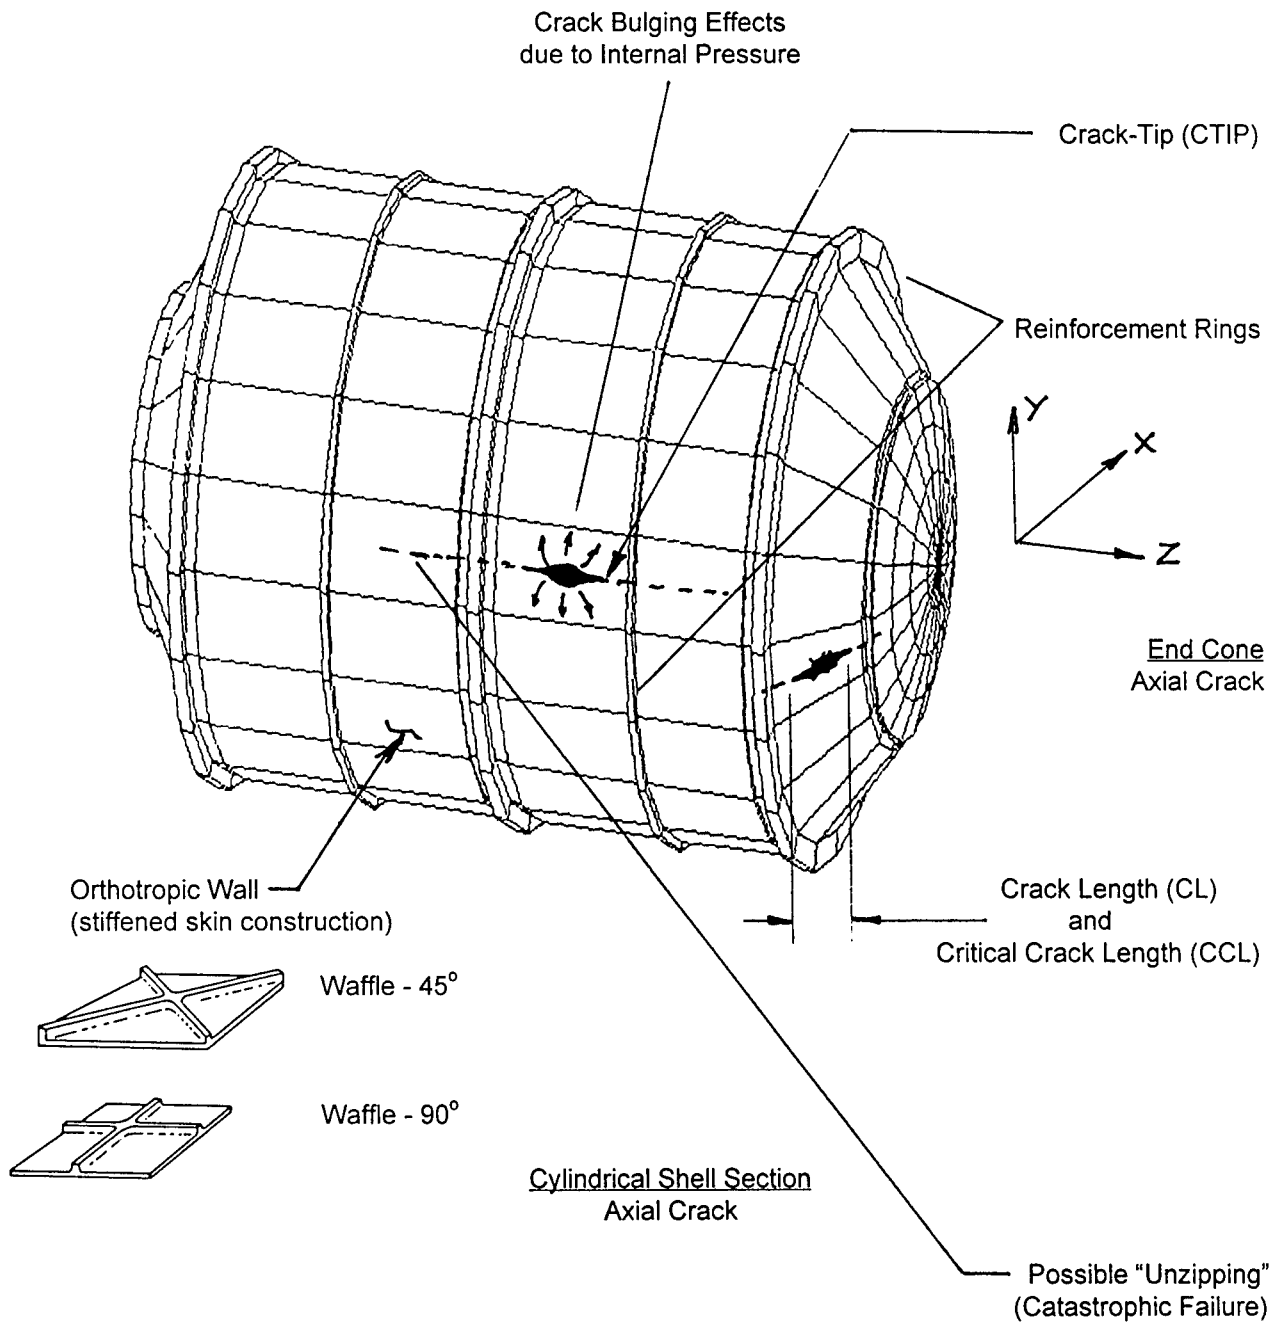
THROUGH THE WALL LONGITUDINAL (axial) CRACKS
